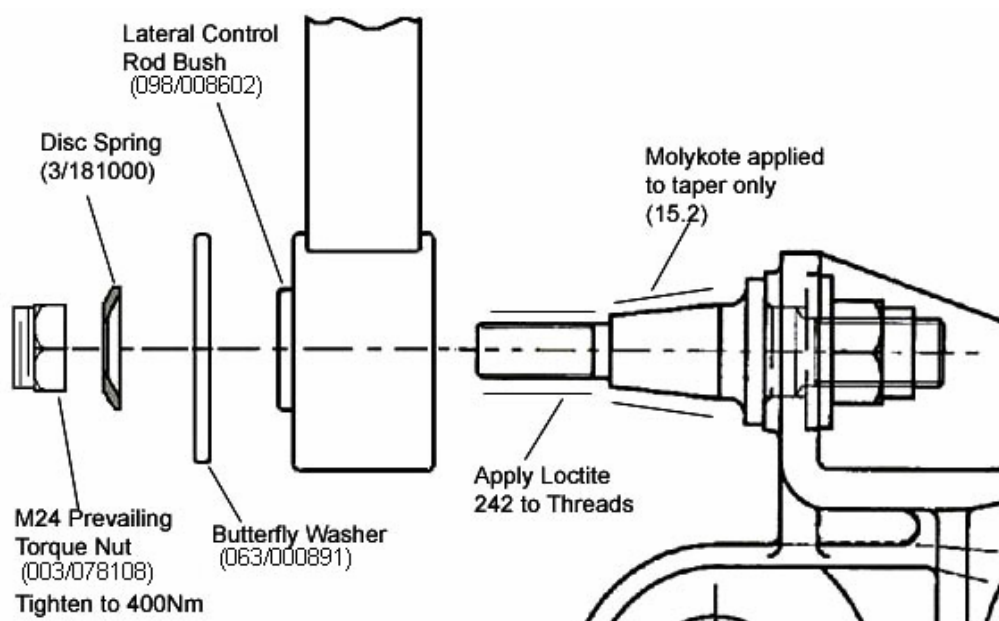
Exploded View of Assembly of LCR onto Axlebox Spigot
